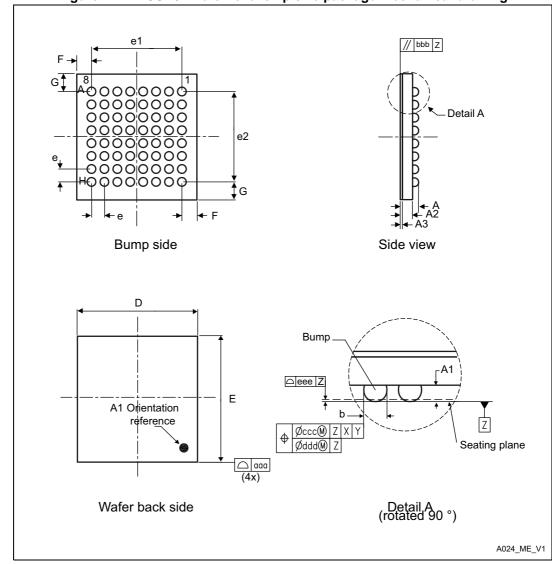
WLCSP64 wafer level chip size package mechanical drawing
